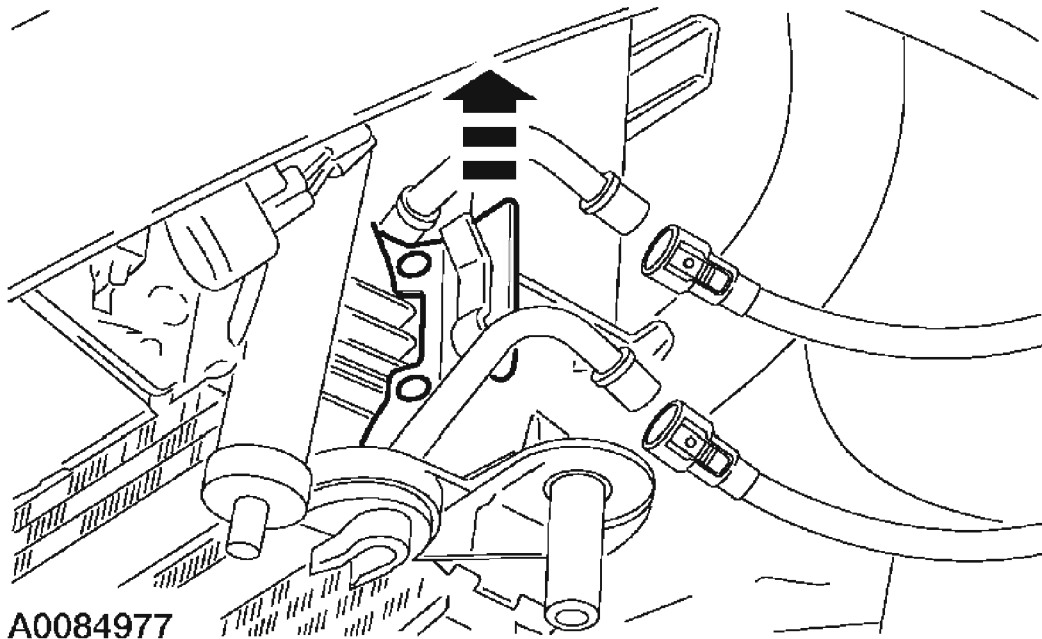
Removing RH And LH Transmission Fluid Cooler Brackets
